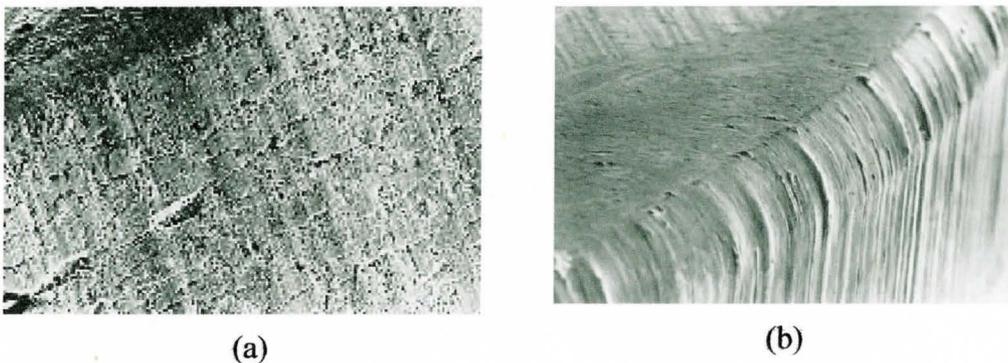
SEM images of wear in stamping tools (a) adhesive wear and (b) abrasive wear [http://www.thefabricator.com/ToolandDie/ToolandDie_Article.cfm].
